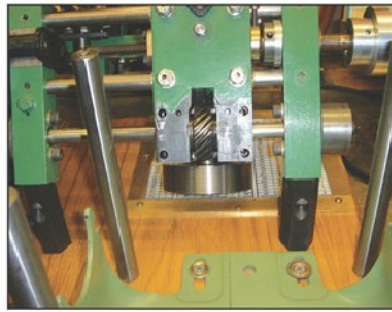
Skew gears and flywheel viewed from the rear of the machine with the motor removed.
